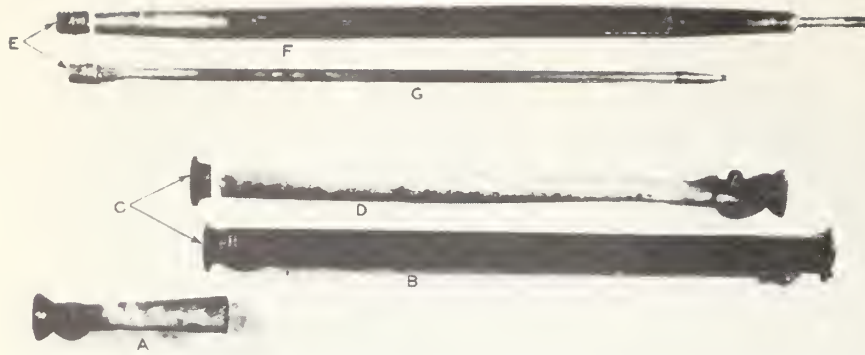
Torque tube and drive-shaft details. A and B, Ford "V-8" torque tube. C and D, Ford model A torque tube. E and F, Ford "V-8" drive shaft. G, Ford model A drive shaft.
